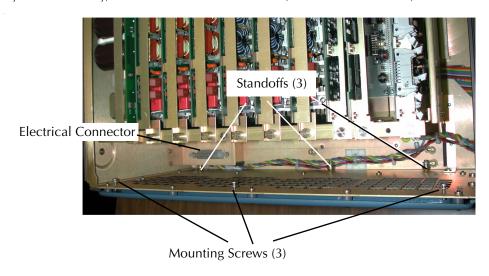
Instrument Chassis with Fan Assembly Removed
